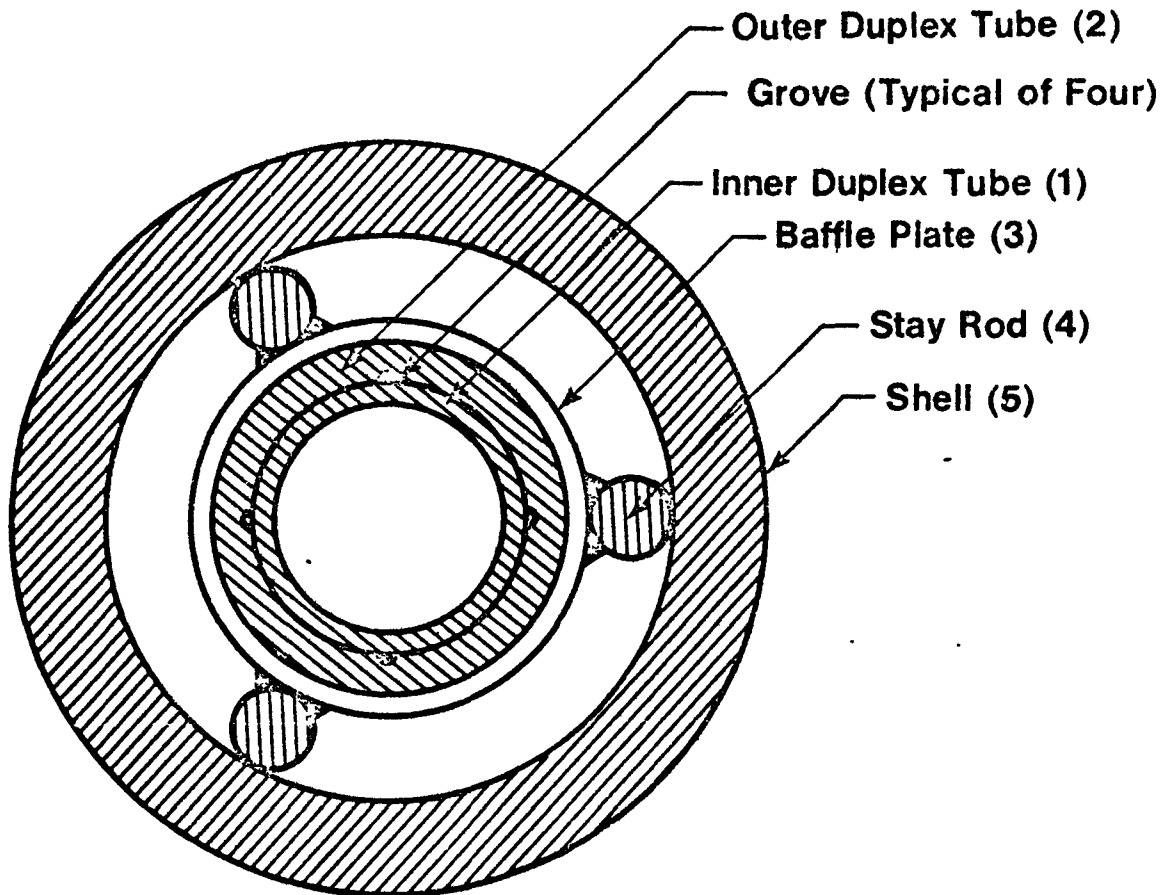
Cross-sectional View of Duplex Tube and Shell. Dimensions are as follows:
